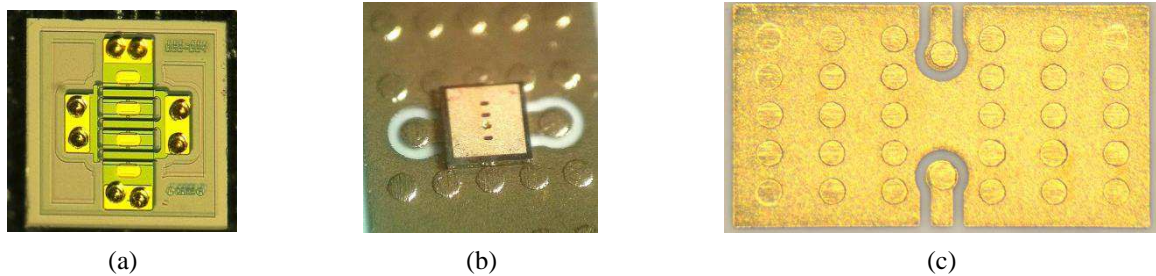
Pictures of the fabricated encapsulated package: (a) stud-bumped GaN die, (a) flip-chip bonded die on the bottom side of the top LCP layer, (c) top-view after encapsulation.
